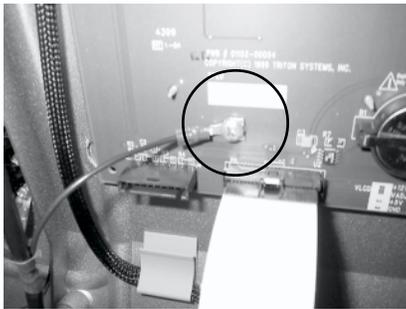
Connect Grounding Strap to SPED board mounting screw.
